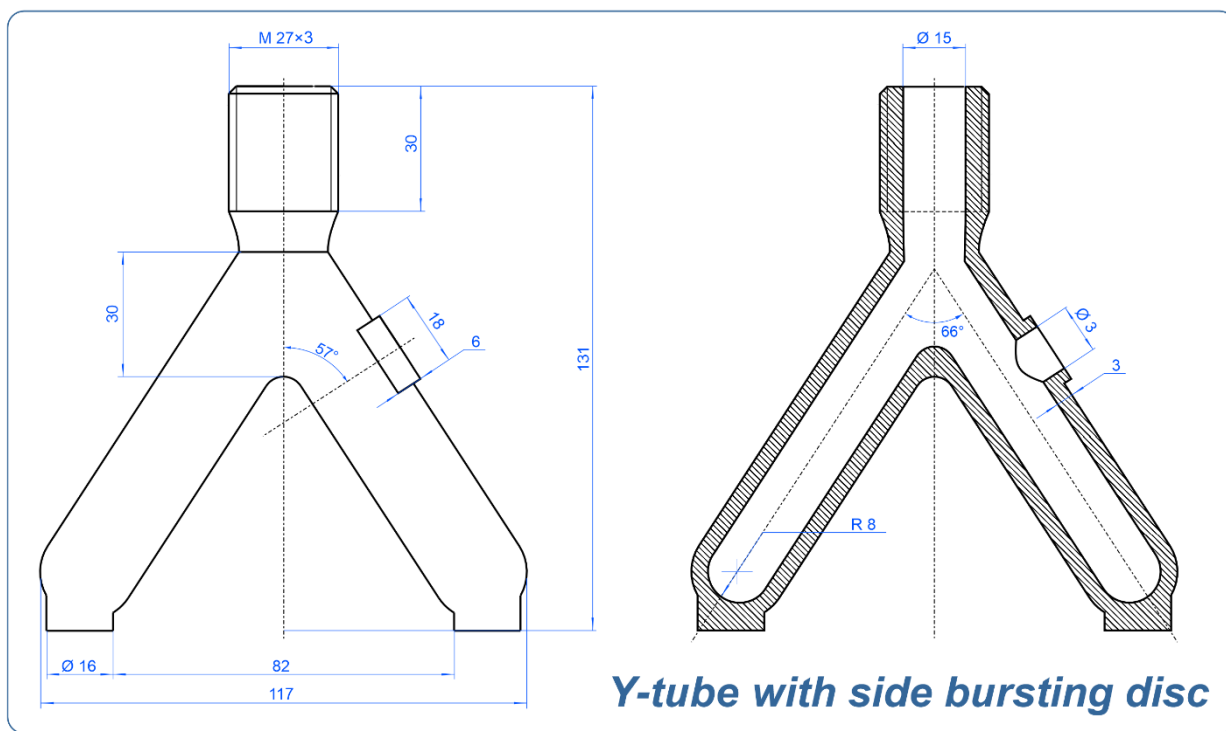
Drawing of the Y-tube type 1 reactor vessel with a side bursting disc.
